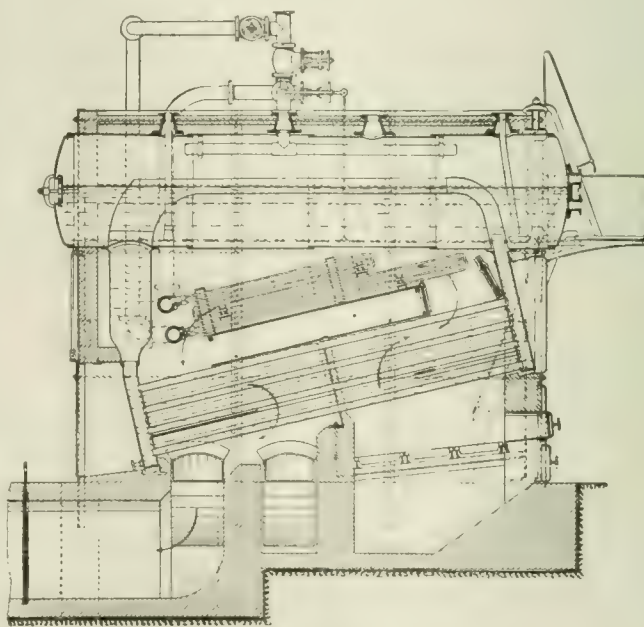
BUETTNER SUPERHEATER IN WATER-TUBE BOILER.
